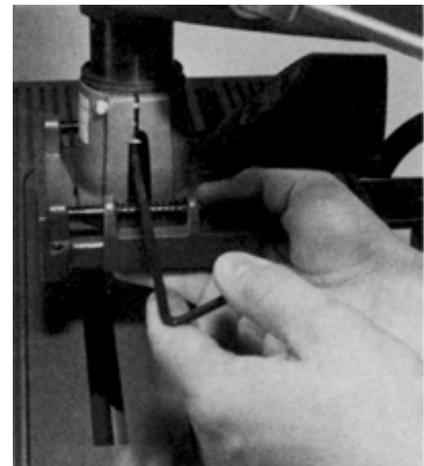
Attach the biscuit joiner to the quill and tighten the housing collar capscrew. Don't forget to tighten the setscrew which holds the blade arbor to the spindle.
